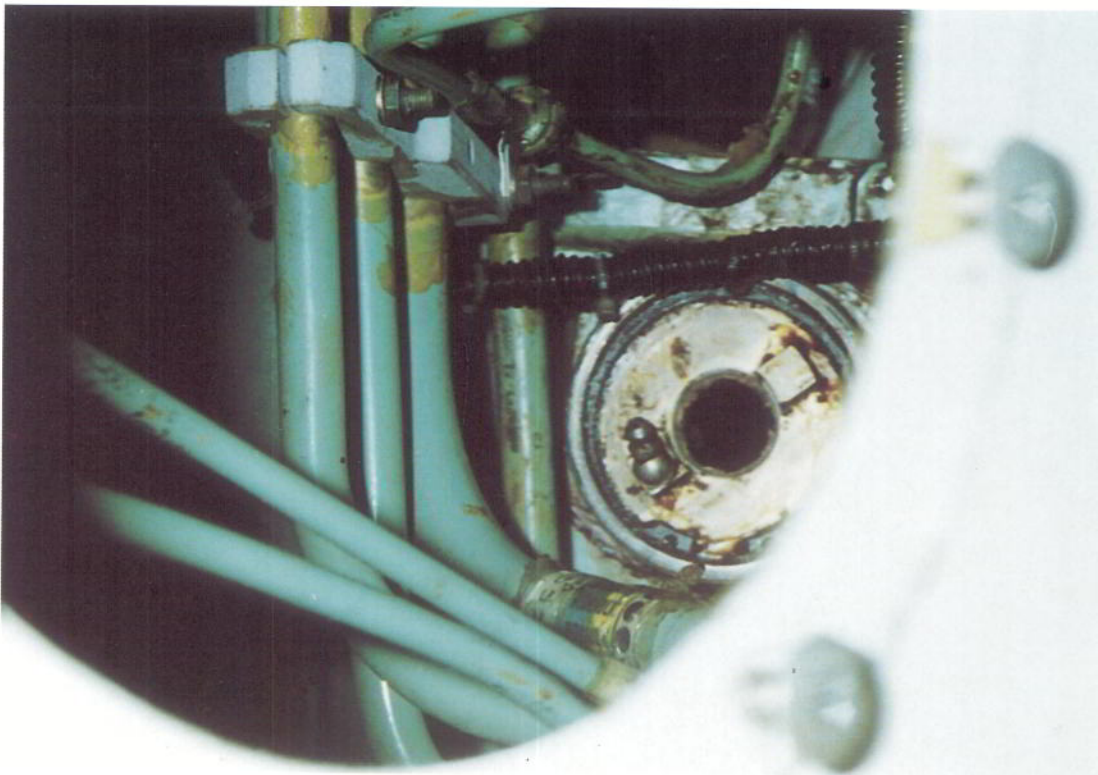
VIEW ON THE RIGHT HAND END OF THE PINTLE PIN AS SEEN AT THE SKIN ACCESS PANEL. THE PIN IS APPROXIMATELY 2 INCHES OUT OF POSITION
